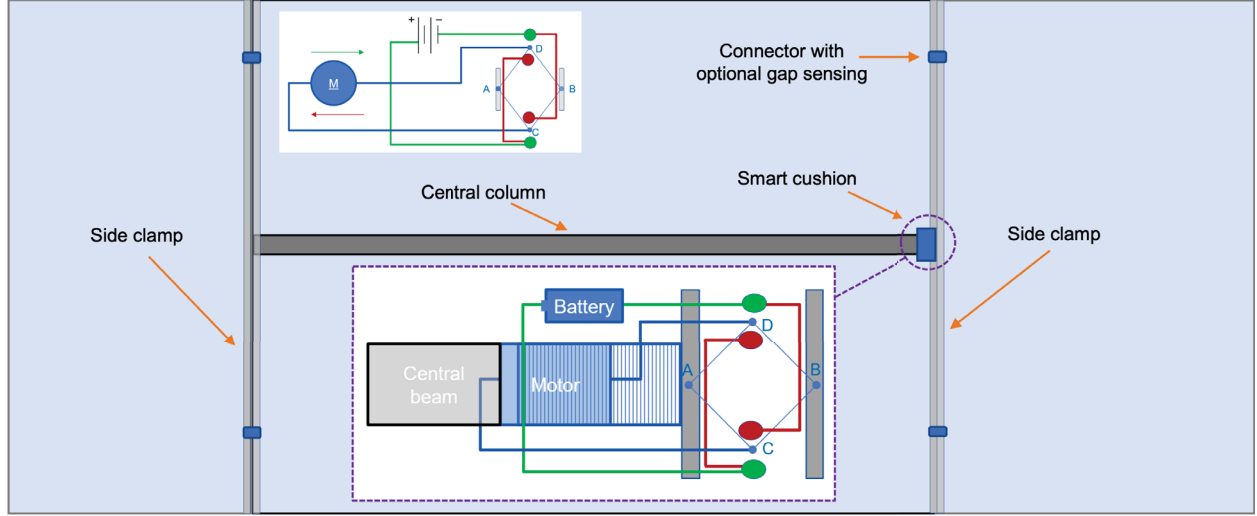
The connection of the smart mounting fixture with self-sensing and control of the dimension of the module
